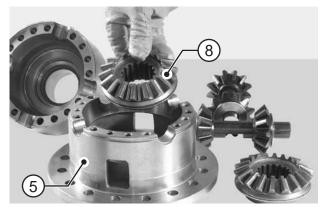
Install the shoulder ring (7) and planetary gear (8) into the halfbox (5).
